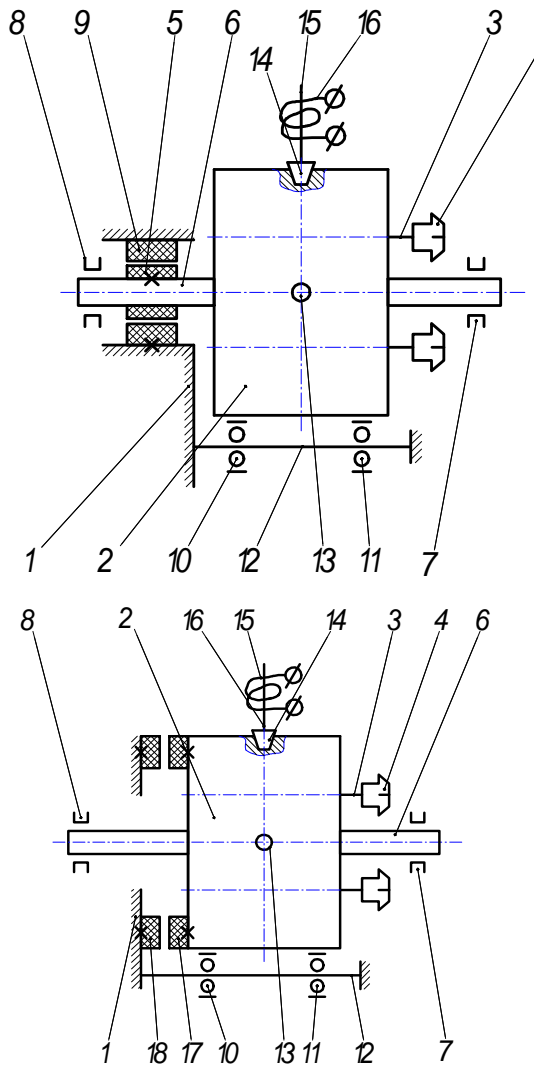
Options for turning and fixing the spindle drum mechanism (Ukrainian patent No 113751): 1 - housing; 2 - spindle drum; 3 - spindles; 4 - chucks; 5 - rotor; 6,12 - axis's; 7 - front support; 8 - pillar support; 9 - stator; 10,11 - bearings; 13 - locks; 14 - fixing clamp; 15 - anchor; 16 - electromagnet
